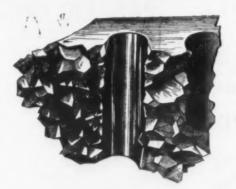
Magnified Fracture of a Steel Hammer Head which had been Exposed for Some Time to a High Temperature.
